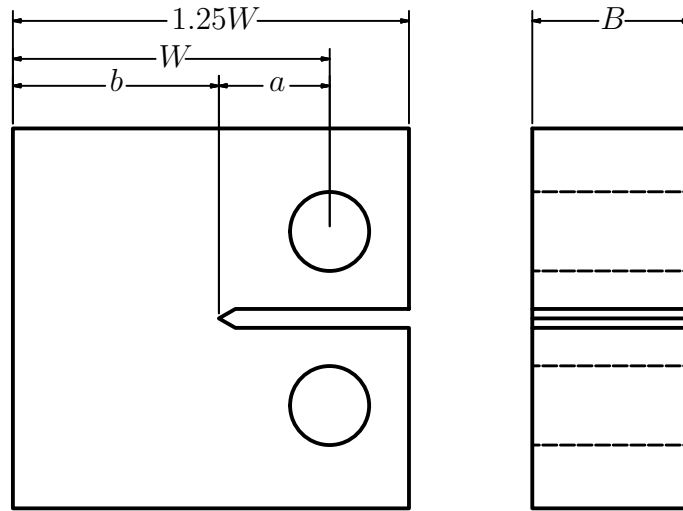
ASTM Standard E399 compact tension specimen geometry, to scale, showing important geometrical dimensions: crack length, a ; width, W ; uncracked ligament length, $b = W - a$; and thickness B . Specific dimensions presented in Table 5.1.
